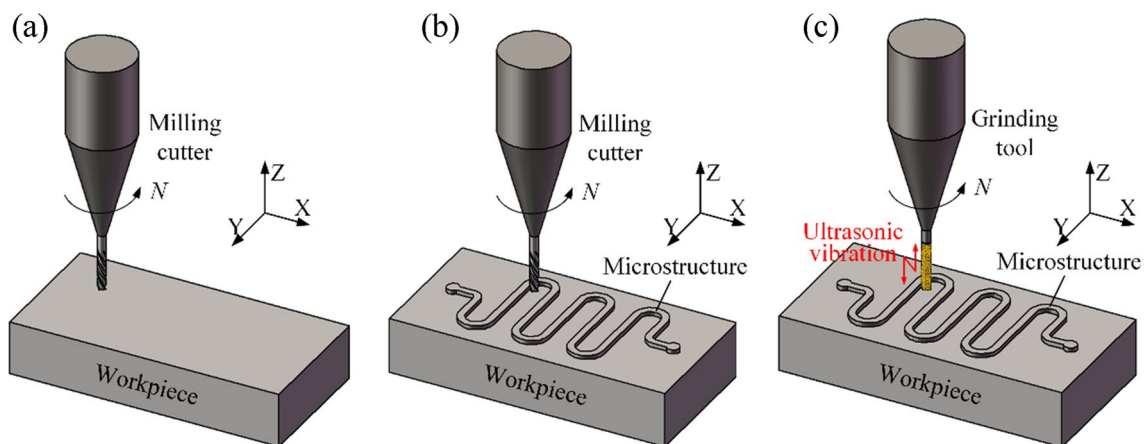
Schematic diagram of mould core machining process: a rough milling, b semi-finish milling, and c fine grinding
